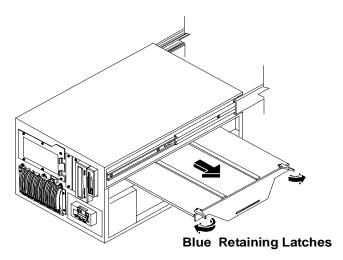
Removing the System Board Assembly from the Rack-mount HP
